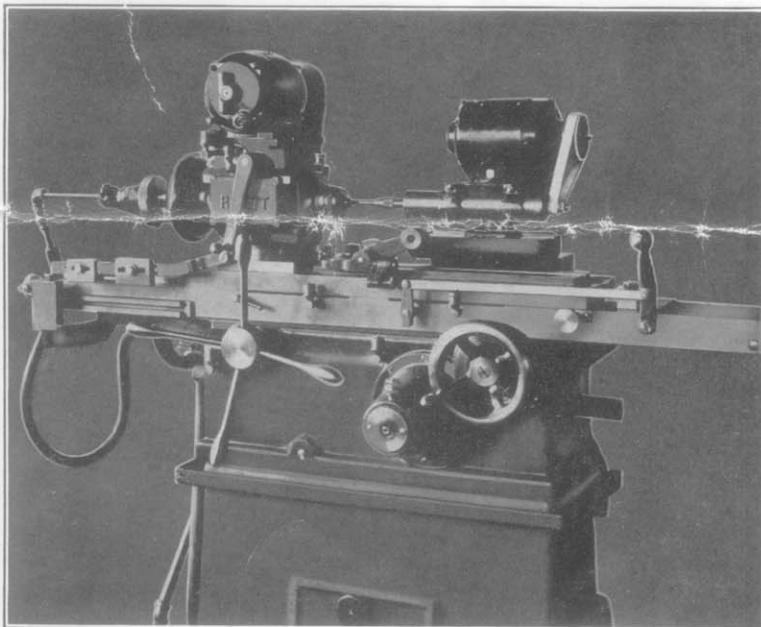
104-Grinder with Unit-Motor-Drive Spindle with Chuck and Mounted Grinding Wheel, and Tip-over Diamond Holder
